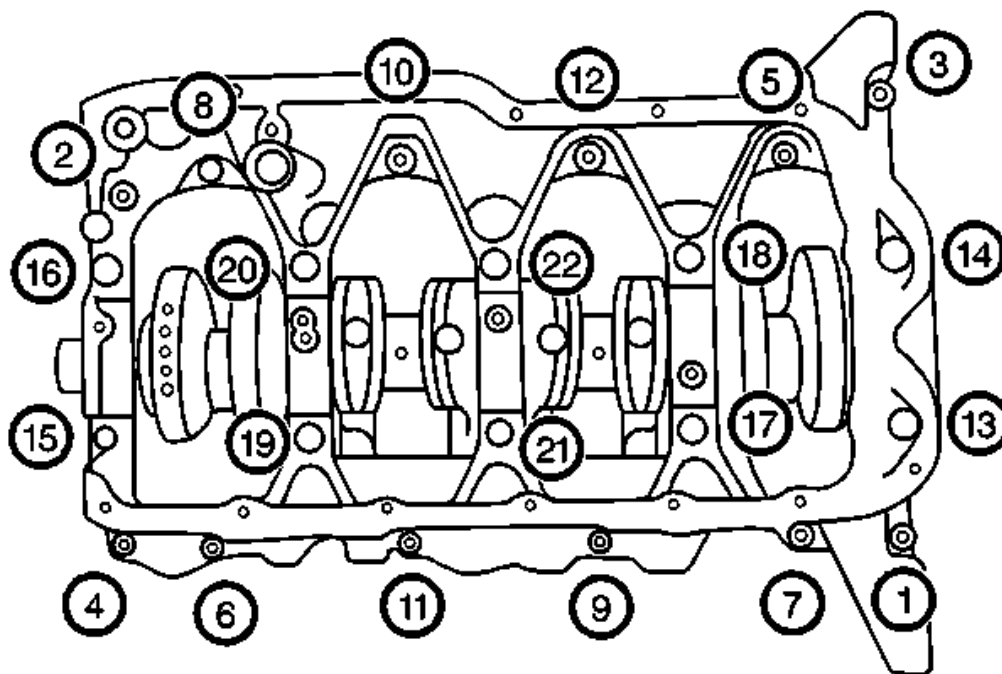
View Of Lower Crankcase & Main Bearing Caps
